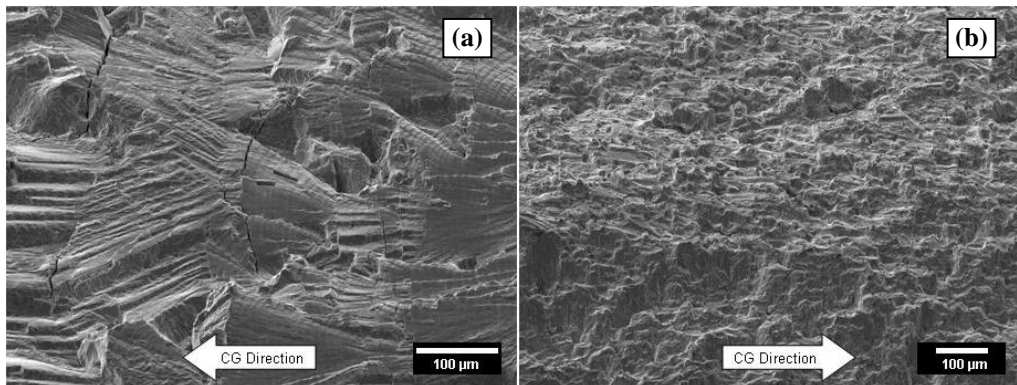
Fracture surface appearance of (a) AA7050-T7451 and (b) AA2024-T3
